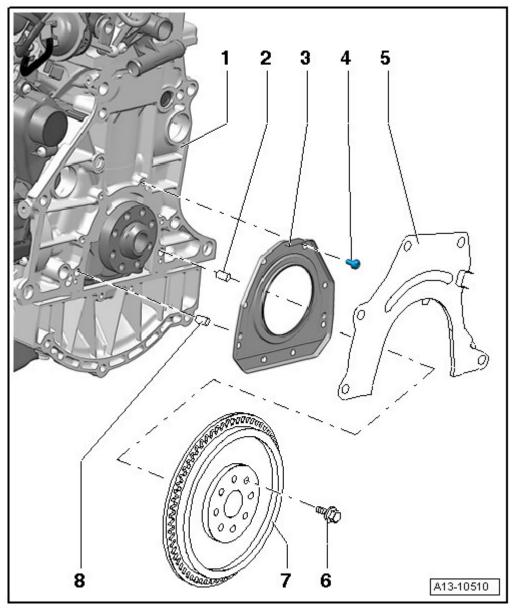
Identifying Sealing Flange And Dual Mass Flywheel Assembly Overview Courtesy of AUDI OF AMERICA, LLC
